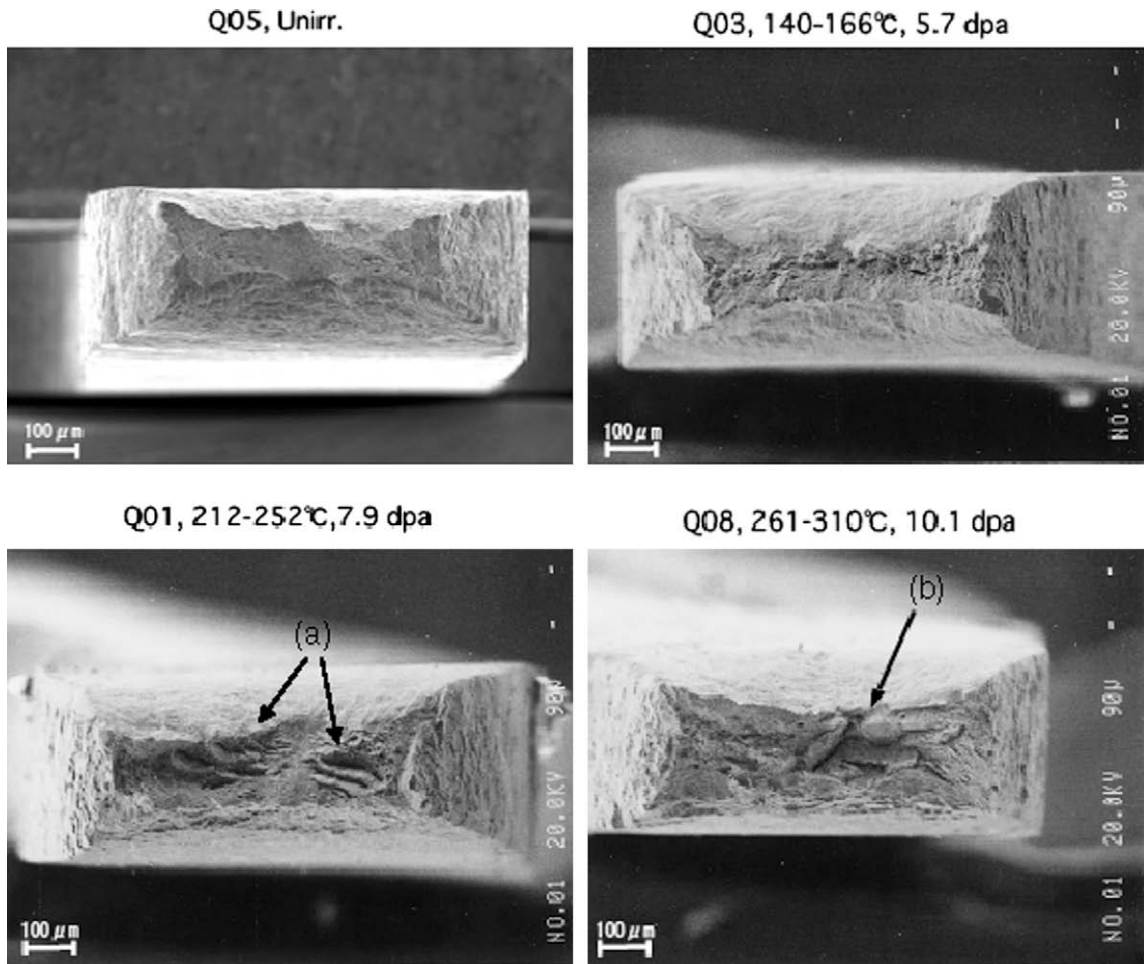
SEM photographs of fracture surface of the unirradiated and the irradiated F82H TIG specimens tested at RT. The black arrows indicate (a) fringe like morphology and (b) unique morphology.
